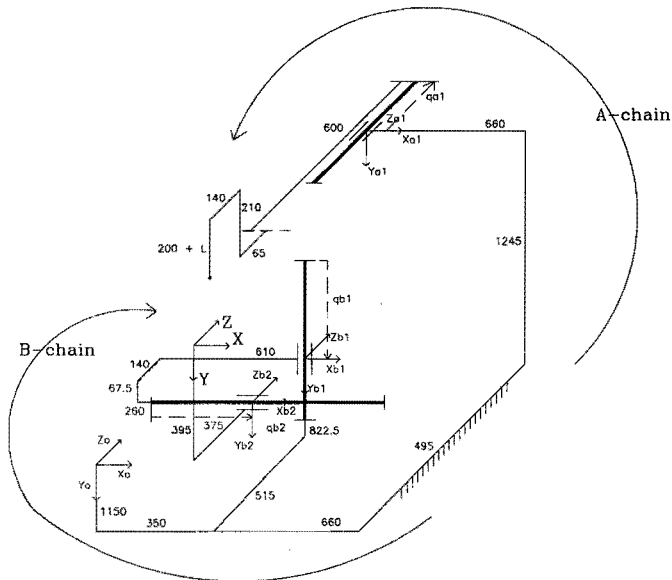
Conventional kinematic model of the milling machine presented in figure 2.5.
